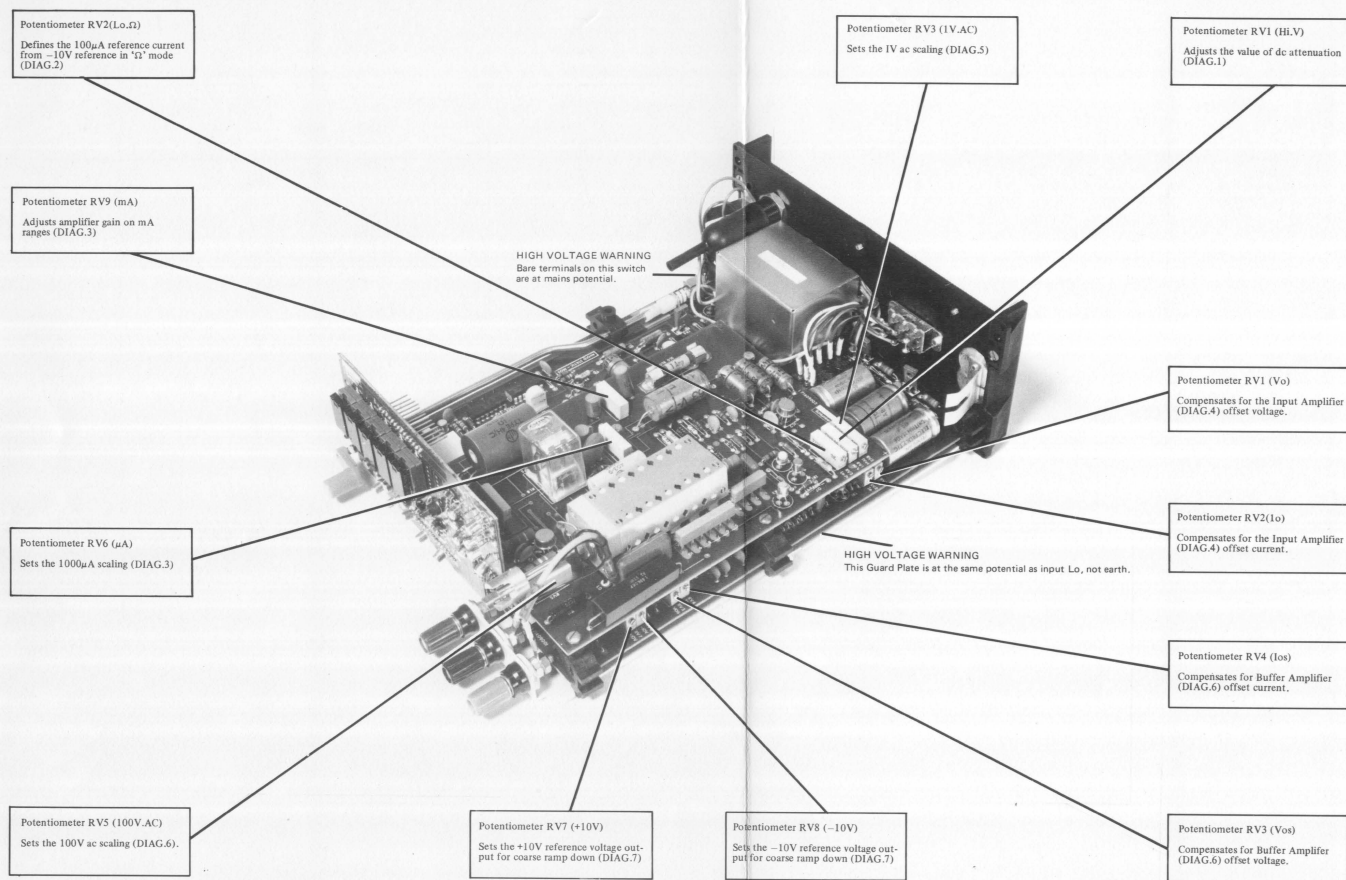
View of PCB Assembly, identifying the Potentiometers and their Functions.
